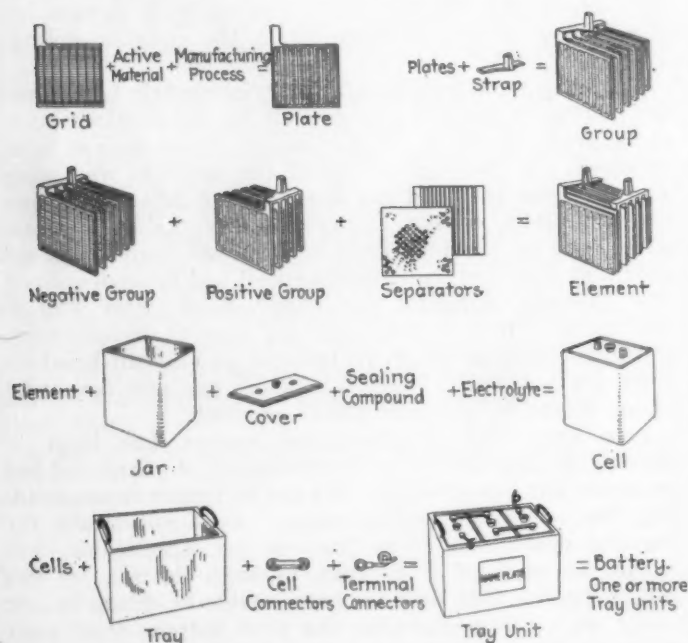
PARTS AND ASSEMBLY OF TYPICAL MOTIVE-POWER STORAGE-BATTERY
